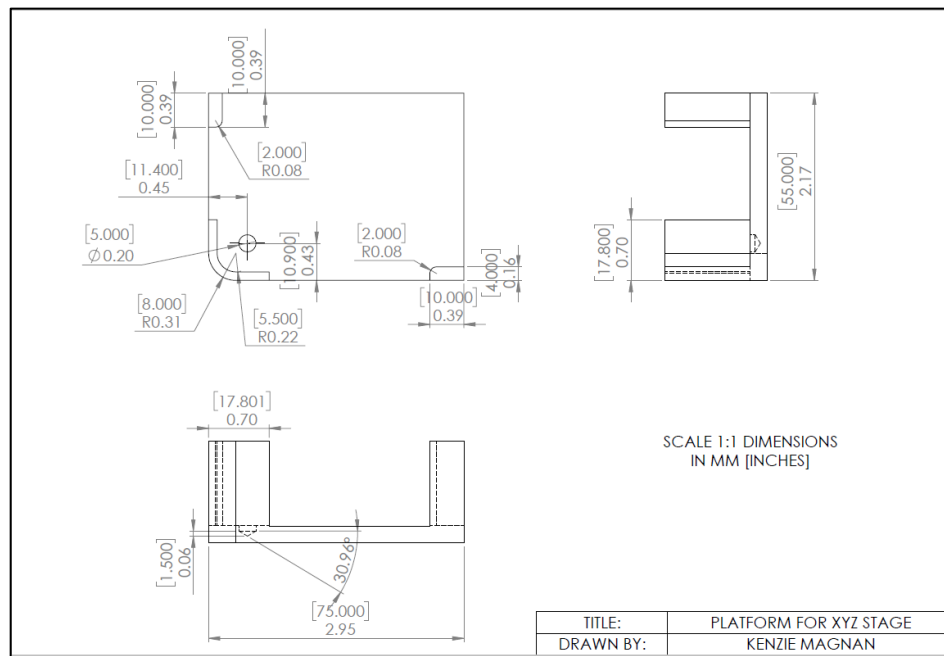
Technical Drawing of Bottom Platform for XYZ Stage
